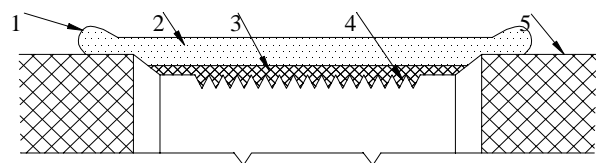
Cross-section through thermally sprayed job. (1)Coating high spots, (2)Final coat, (3)Primary coat, (4)Rough thread cutting on the job before spraying, (5)The job masked at undesired portion to prevent spraying at these regions.
